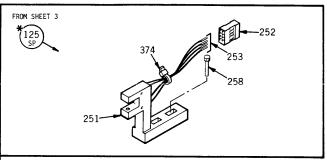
DRIVE MOTOR ASSEMBLY (SHEET 1 of 2)
